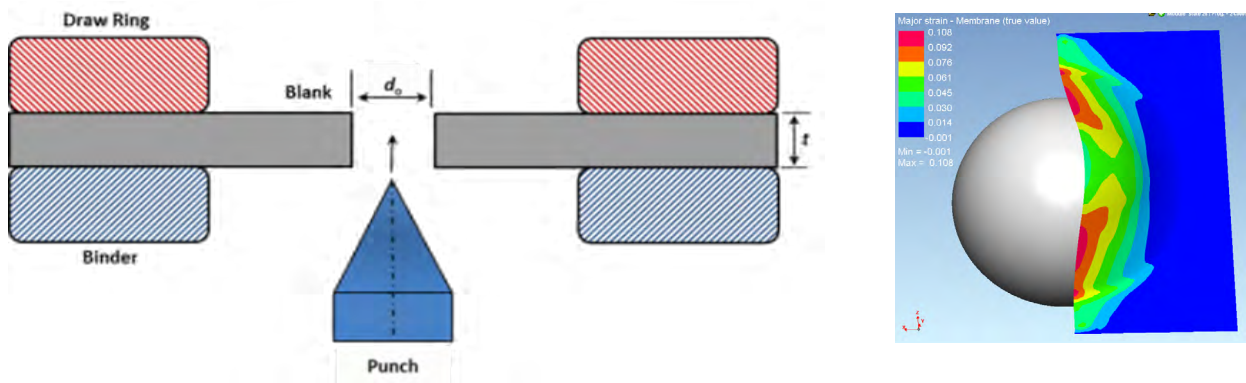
| Hole expansion test (left) and half dome test (right).
